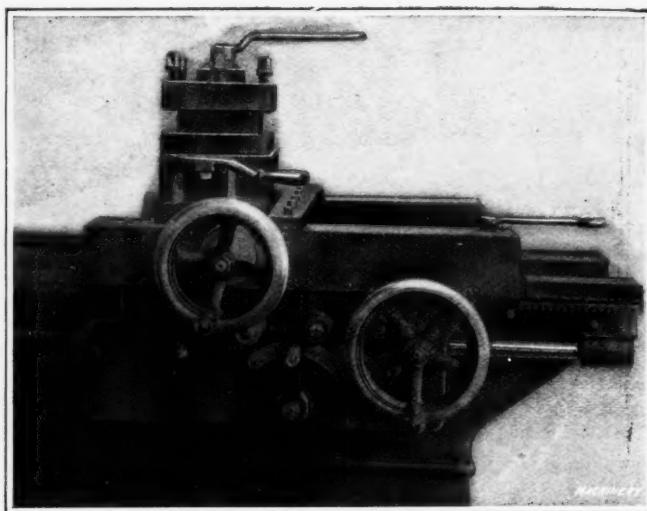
Close View of Apron, showing Arrangement of Feed Reverse Lever
